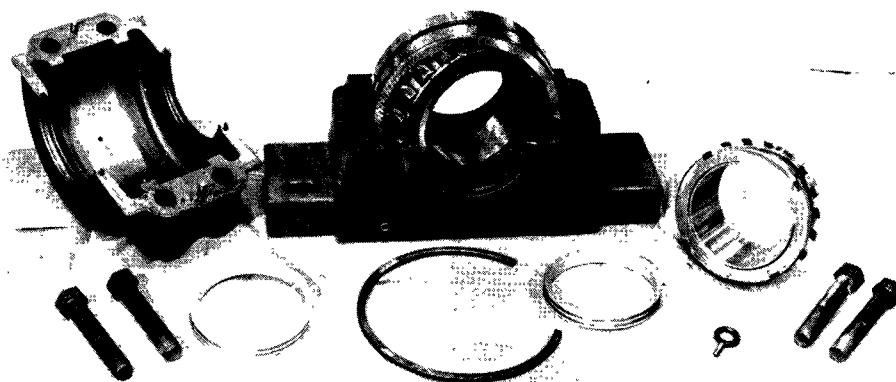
RBC shaft bearing assembly (courtesy of Crane-Cochrane).
